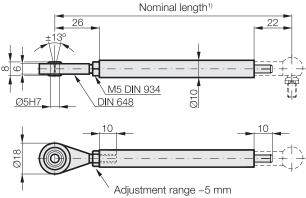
BTL2-GS10-\_\_\_-A joint rod
